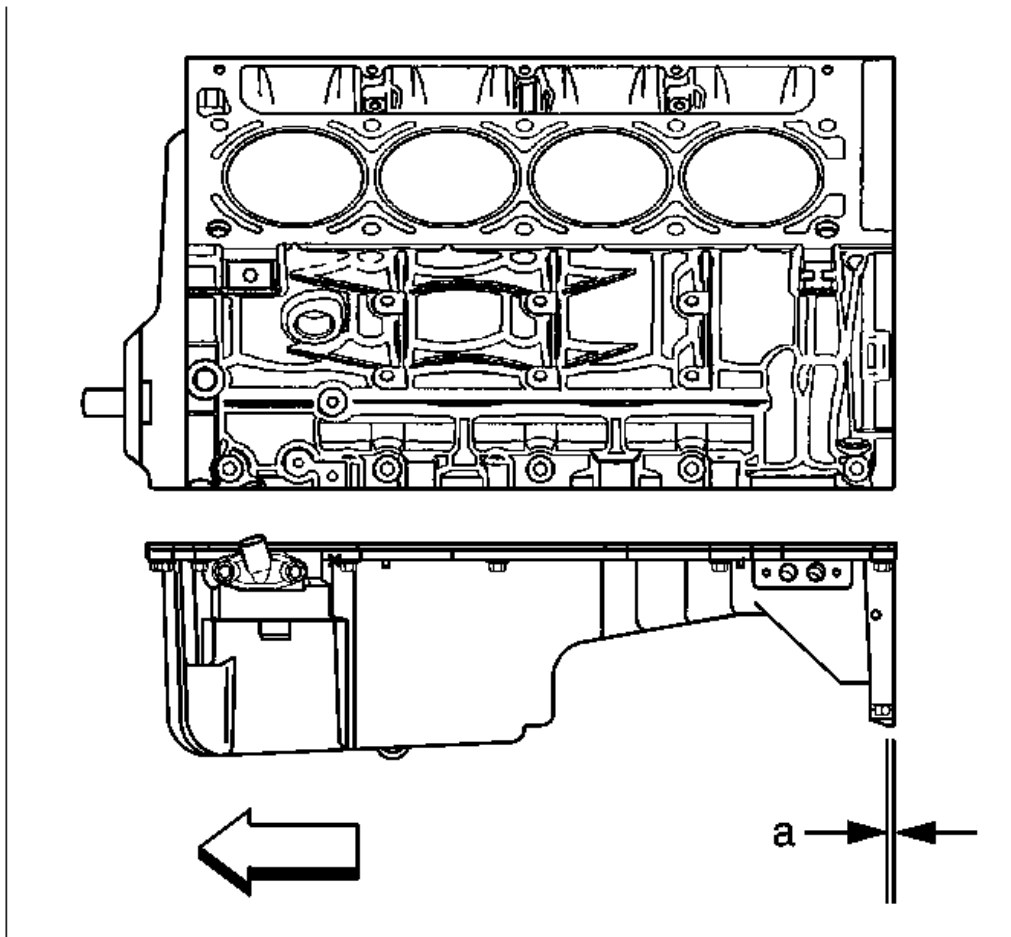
Measuring Oil Pan-To-Engine Block Alignment
